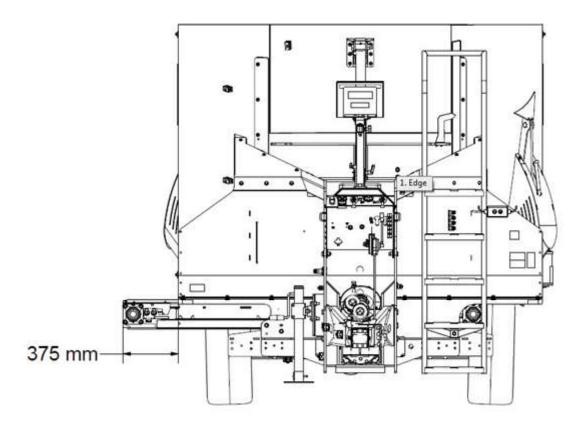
Fixed Horizontal Conveyor Offset by 375 mm (14.75 in.) on the Left
